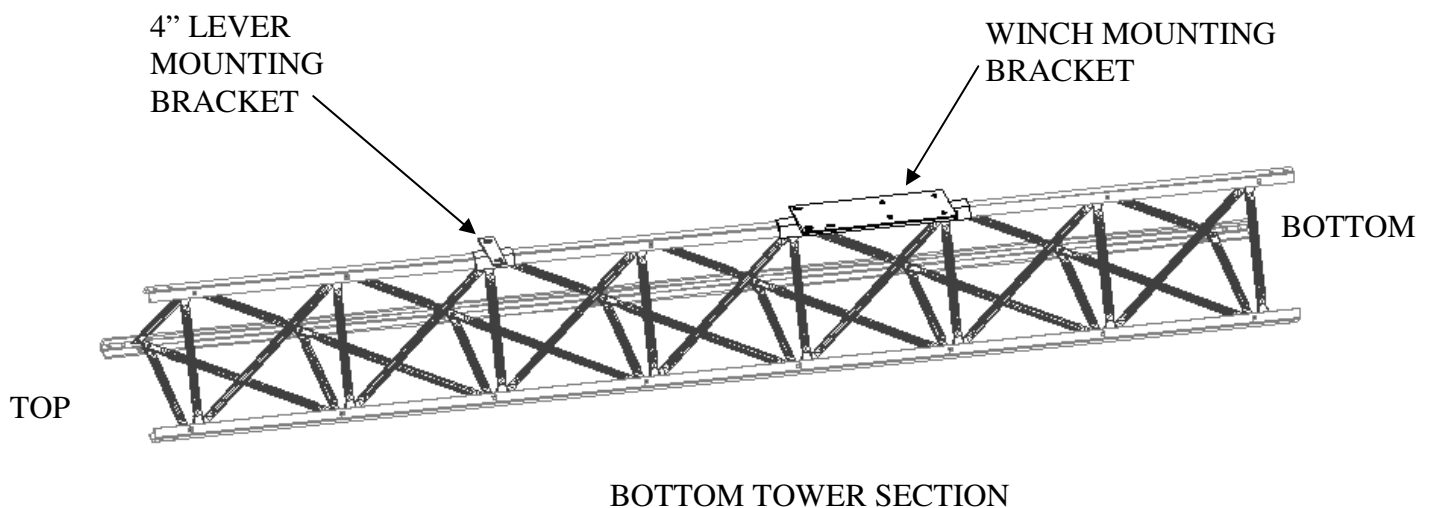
Bottom Tower Section with Mounting Brackets Installed
